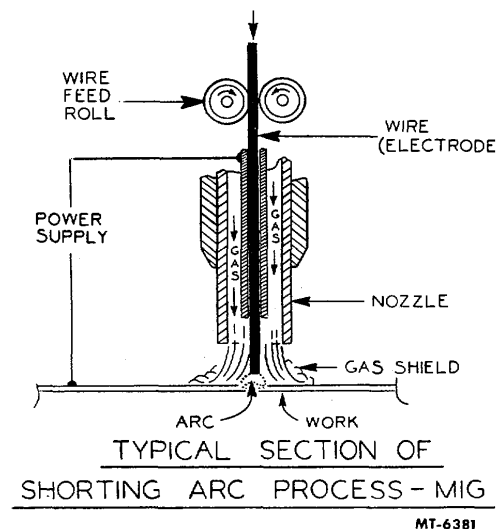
Diagram Showing Details of Shorting Arc Process and the Inert Gas Shielding
